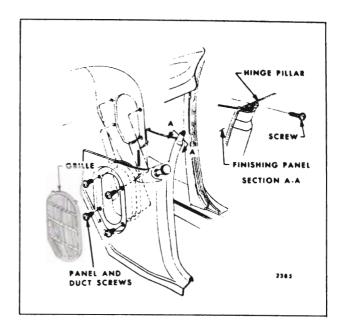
Shroud Side Finishing Panel and Air Outlet
